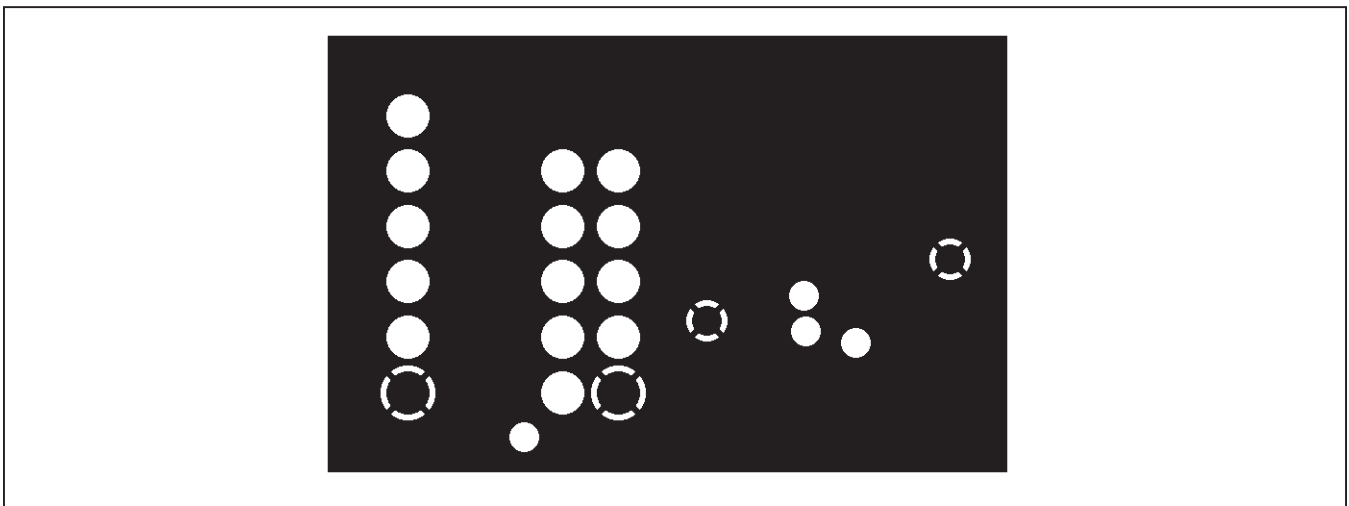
MAX31723PMB1 Peripheral Module PCB Layout—Inner Layer 2 (Power)
